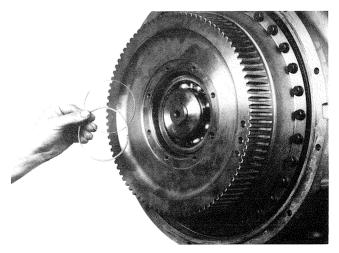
Remove bearing retainer oil sealing ring and expander spring.
